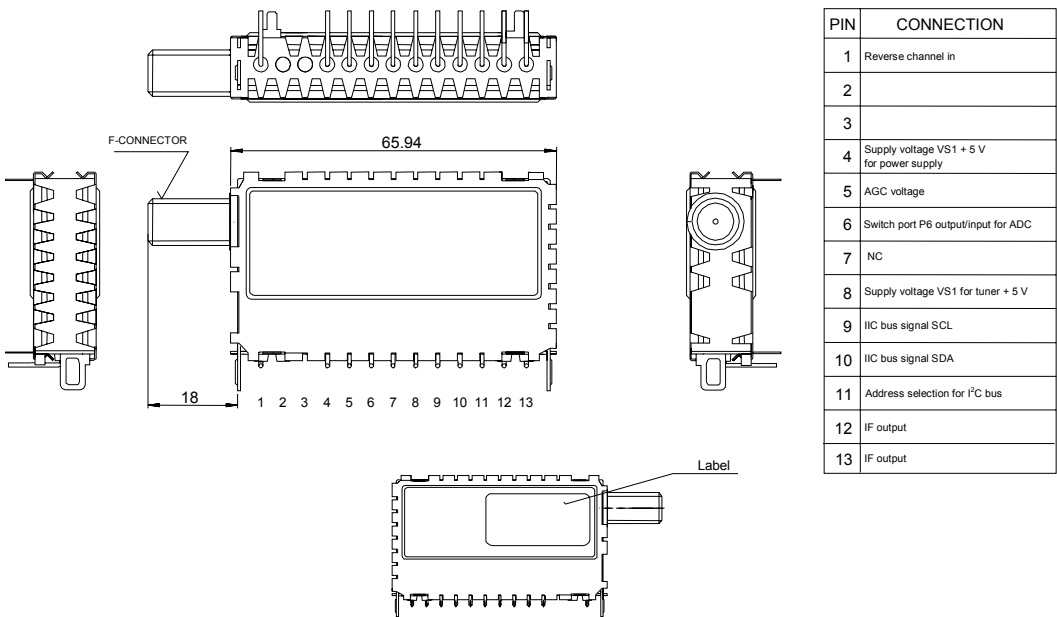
4736 PY5 RF Tuner Module Mechanical Drawing
